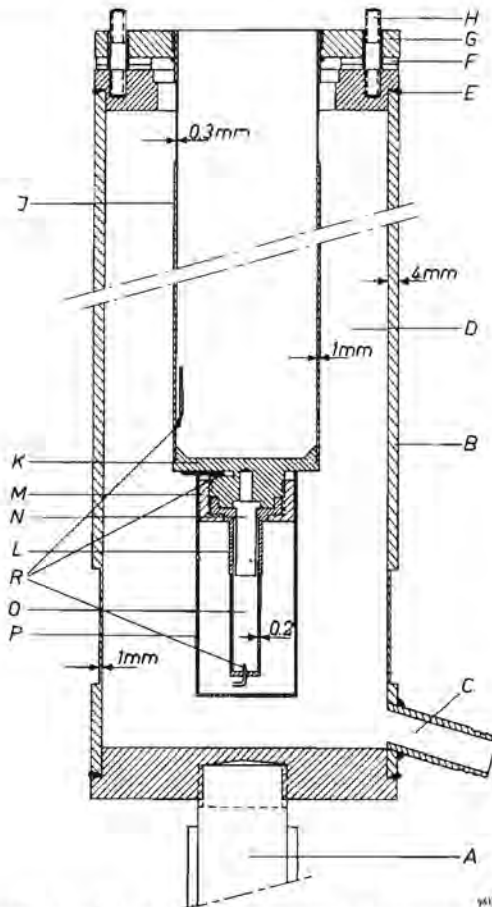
Vertical section through cryostat for low-temperature neutron diffraction. *A*: support. *B*: aluminium outer cylinder. *C*: vacuum line. *D*: vacuum jacket. *E*: aluminium flange. *F*: pair of rubber washers. *G*: stainless steel flange. *H*: stud. *J*: stainless steel inner cryostat cylinder. *K*: brass bottom of inner cylinder. *L*: aluminium specimen holder. *M*: specimen-holder clamping nut. *N*: aluminium specimen-holder plug. *O*: specimen. *P*: thermal radiation shield. *R*: thermocouples.
